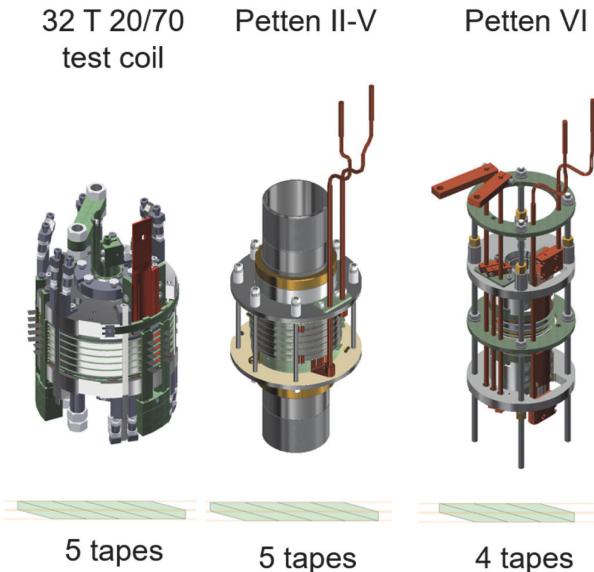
REBCO test coils, with crossover configurations used represented below each coil.
